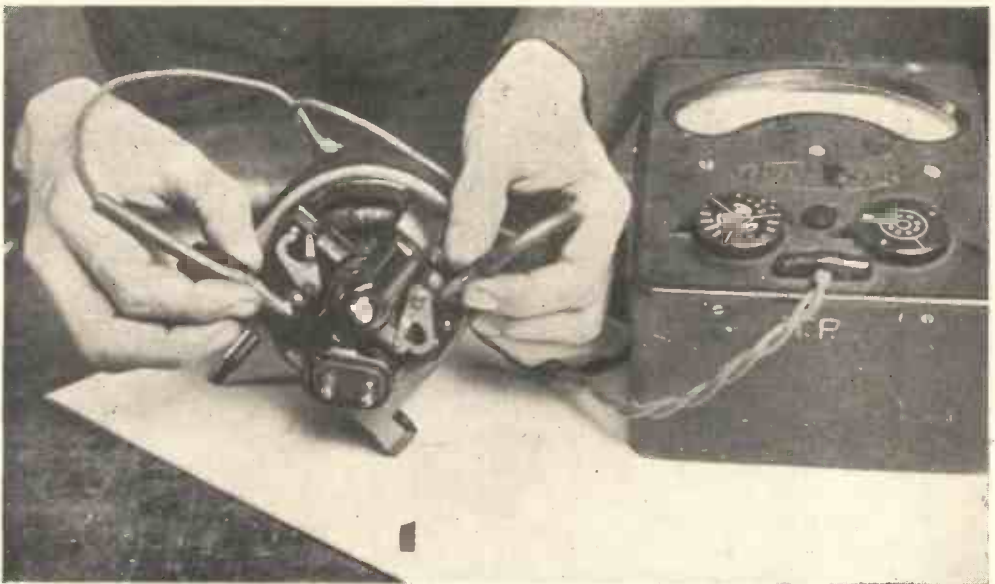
CHECKING THE FIELD WINDING OF THE TYPE 82 MOTOR.
